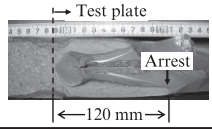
Dimension of ultra-wide duplex ESSO test specimen
